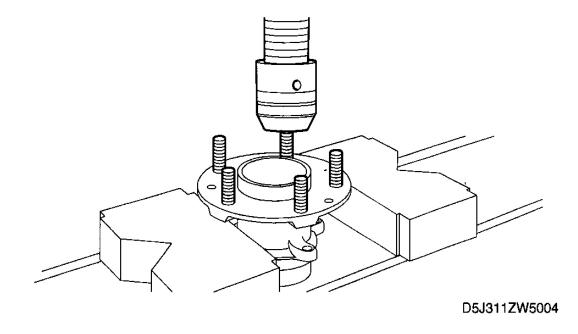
Removing Wheel Hub Bolts From Wheel Hub Using Press Courtesy of MAZDA MOTORS CORP.
